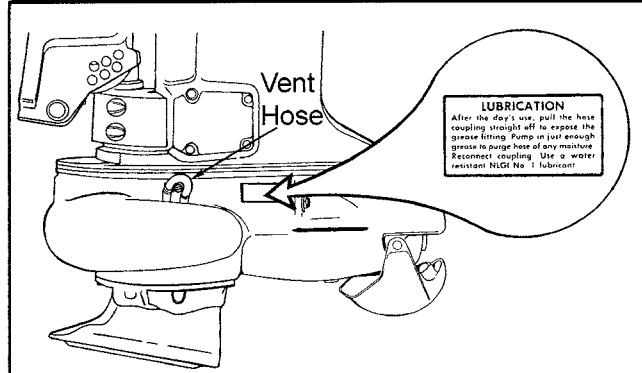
Jet drive models require lubrication of the bearing after each day of use, a label on the housing usually reminds the owner
